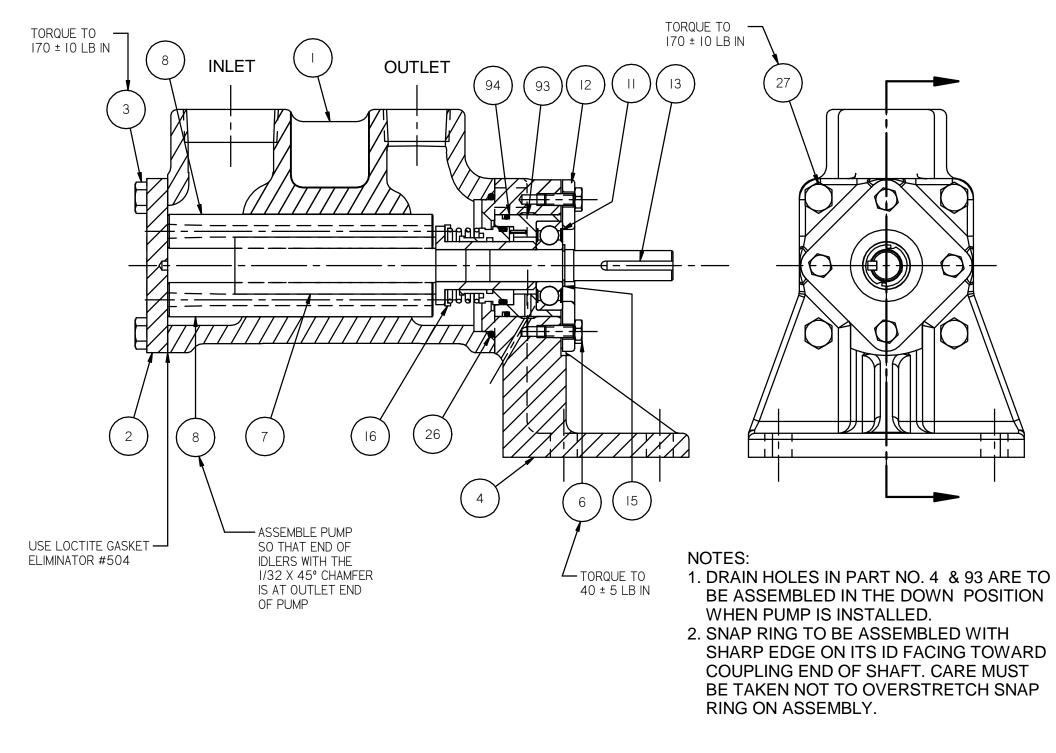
IRON CASE FOOT MOUNT ASSEMBLY
